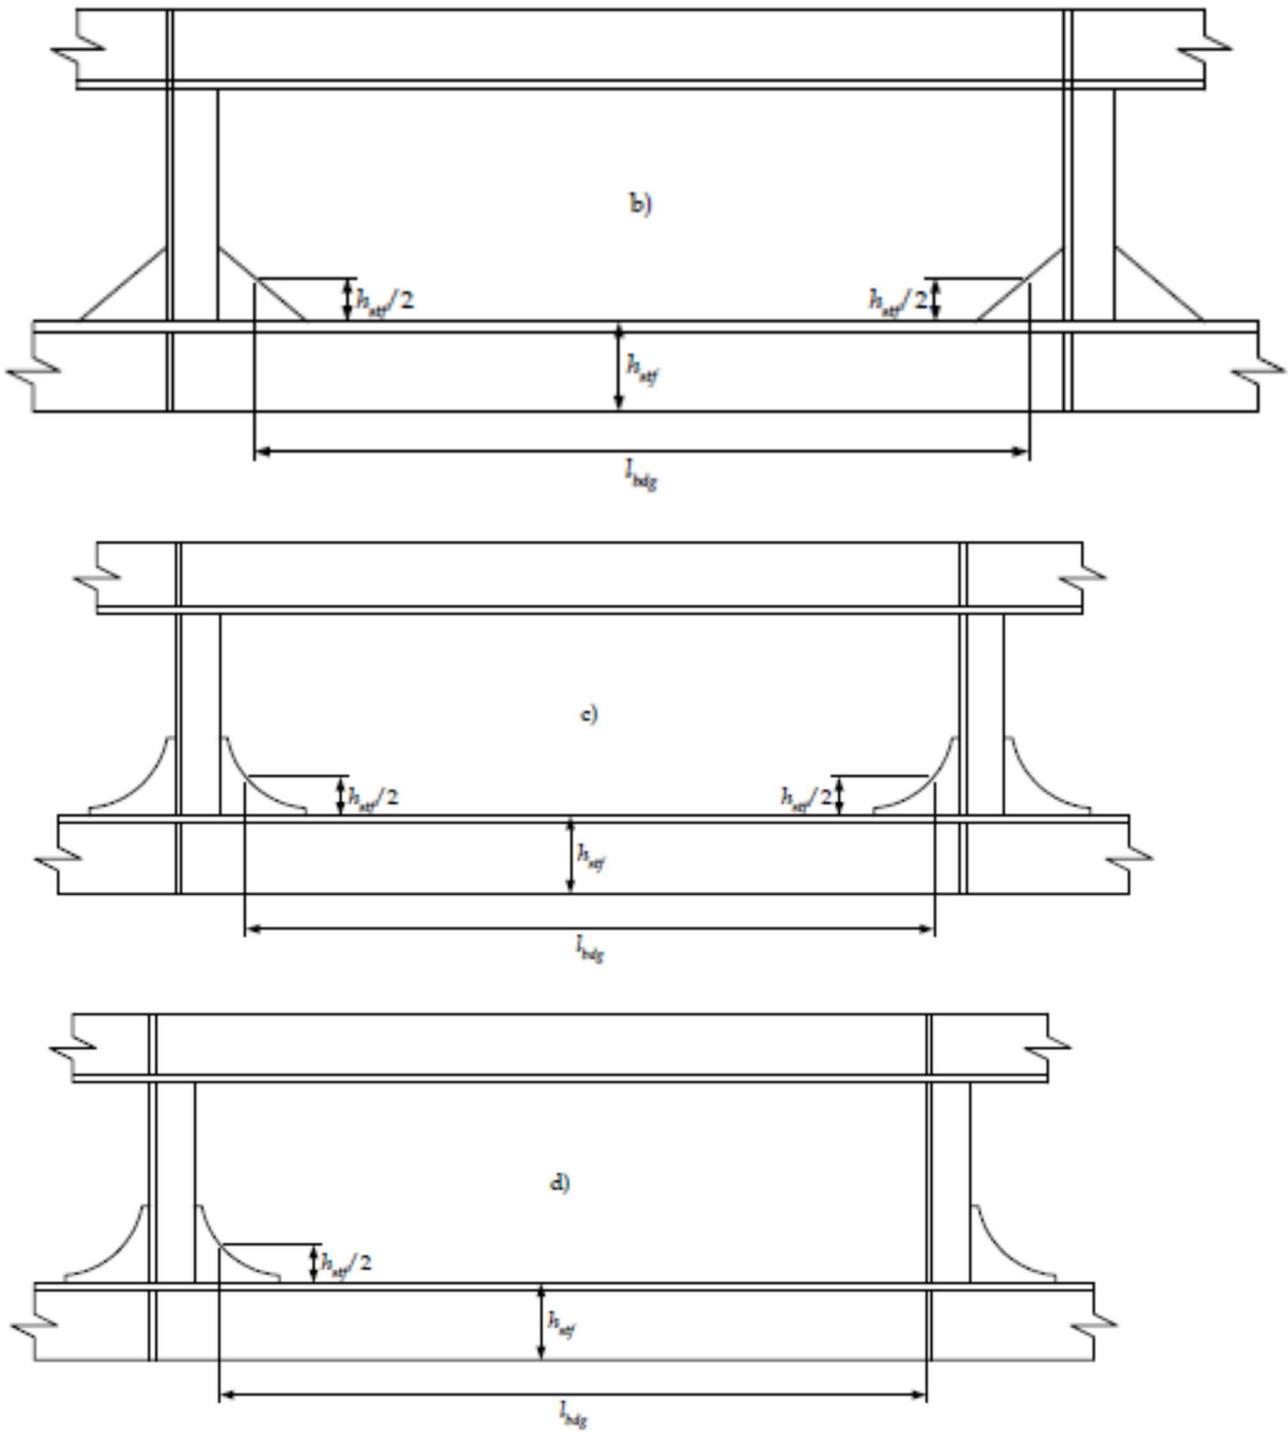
Effective Bending Span of Stiffeners Supported by Web Stiffeners (Double Skin Construction)
